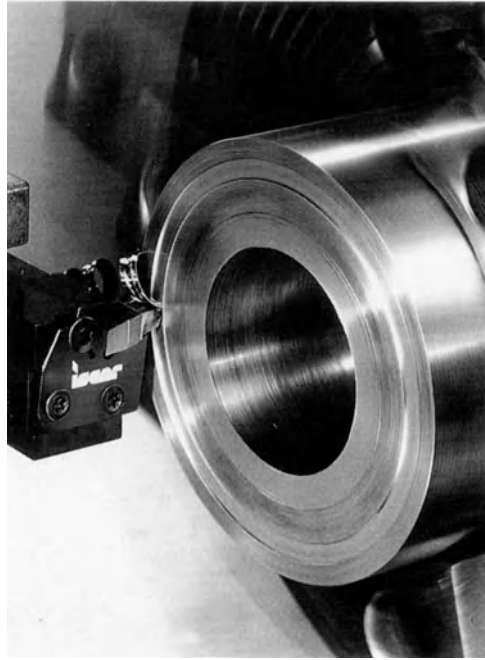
A face-grooving operation using a sophisticated insert geometry for good chip control. [Courtesy of Iscar Tools.]
